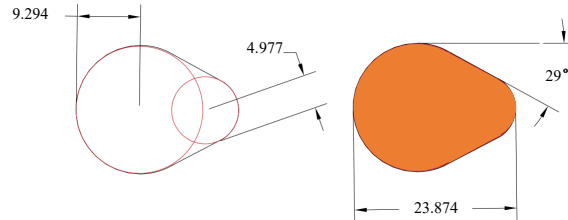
Proposed rotor cut-outs (dimension in mm).
